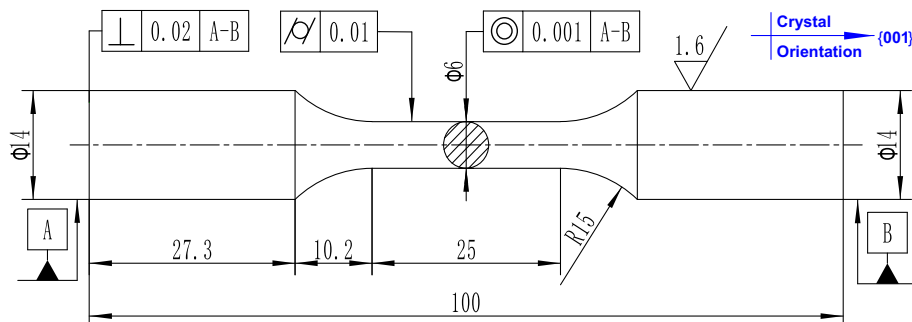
Shape and dimensions of the specimen for the LCF tests (all dimensions in mm).
